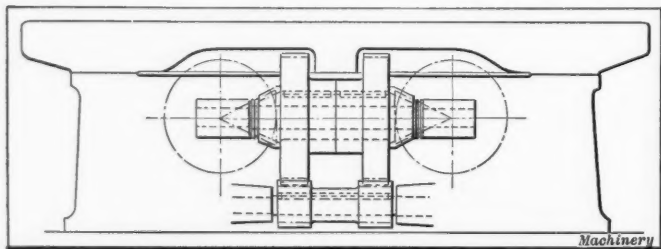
Twin-screw Planer with Drive having Thrusts Equalized
